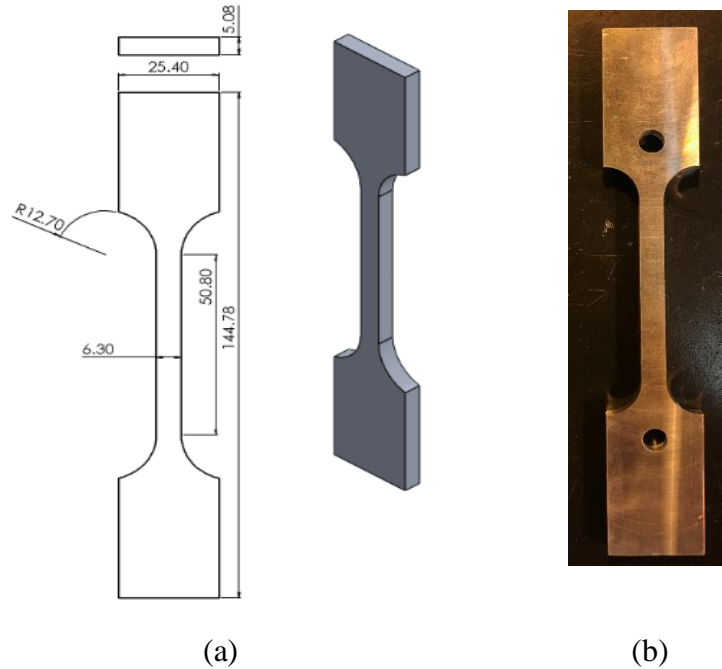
Dog bone specimen constructed in the longitudinal direction (LDD) from original bars (a) drawing of the test section, and (b) photograph of the test section. All units in mm.
